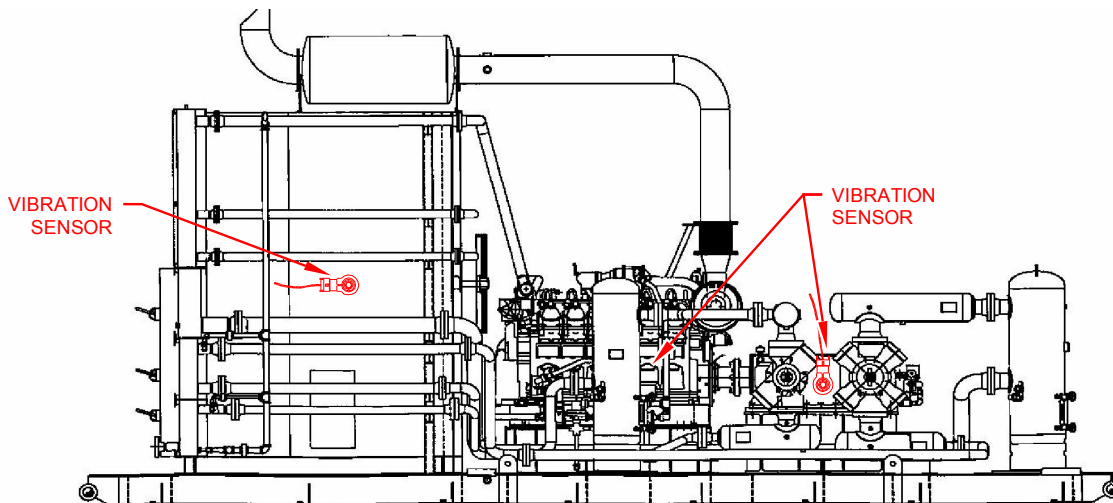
B. TYPICAL SENSOR MOUNTING LOCATIONS
